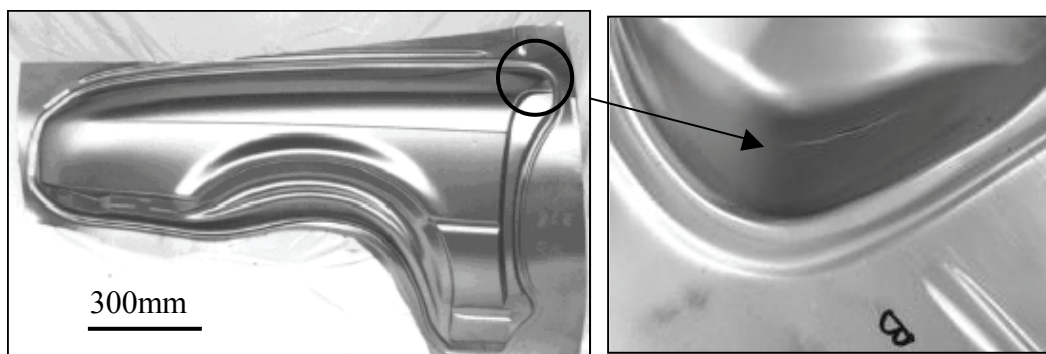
Automotive model panel (front fender panel) used in trial stamping
